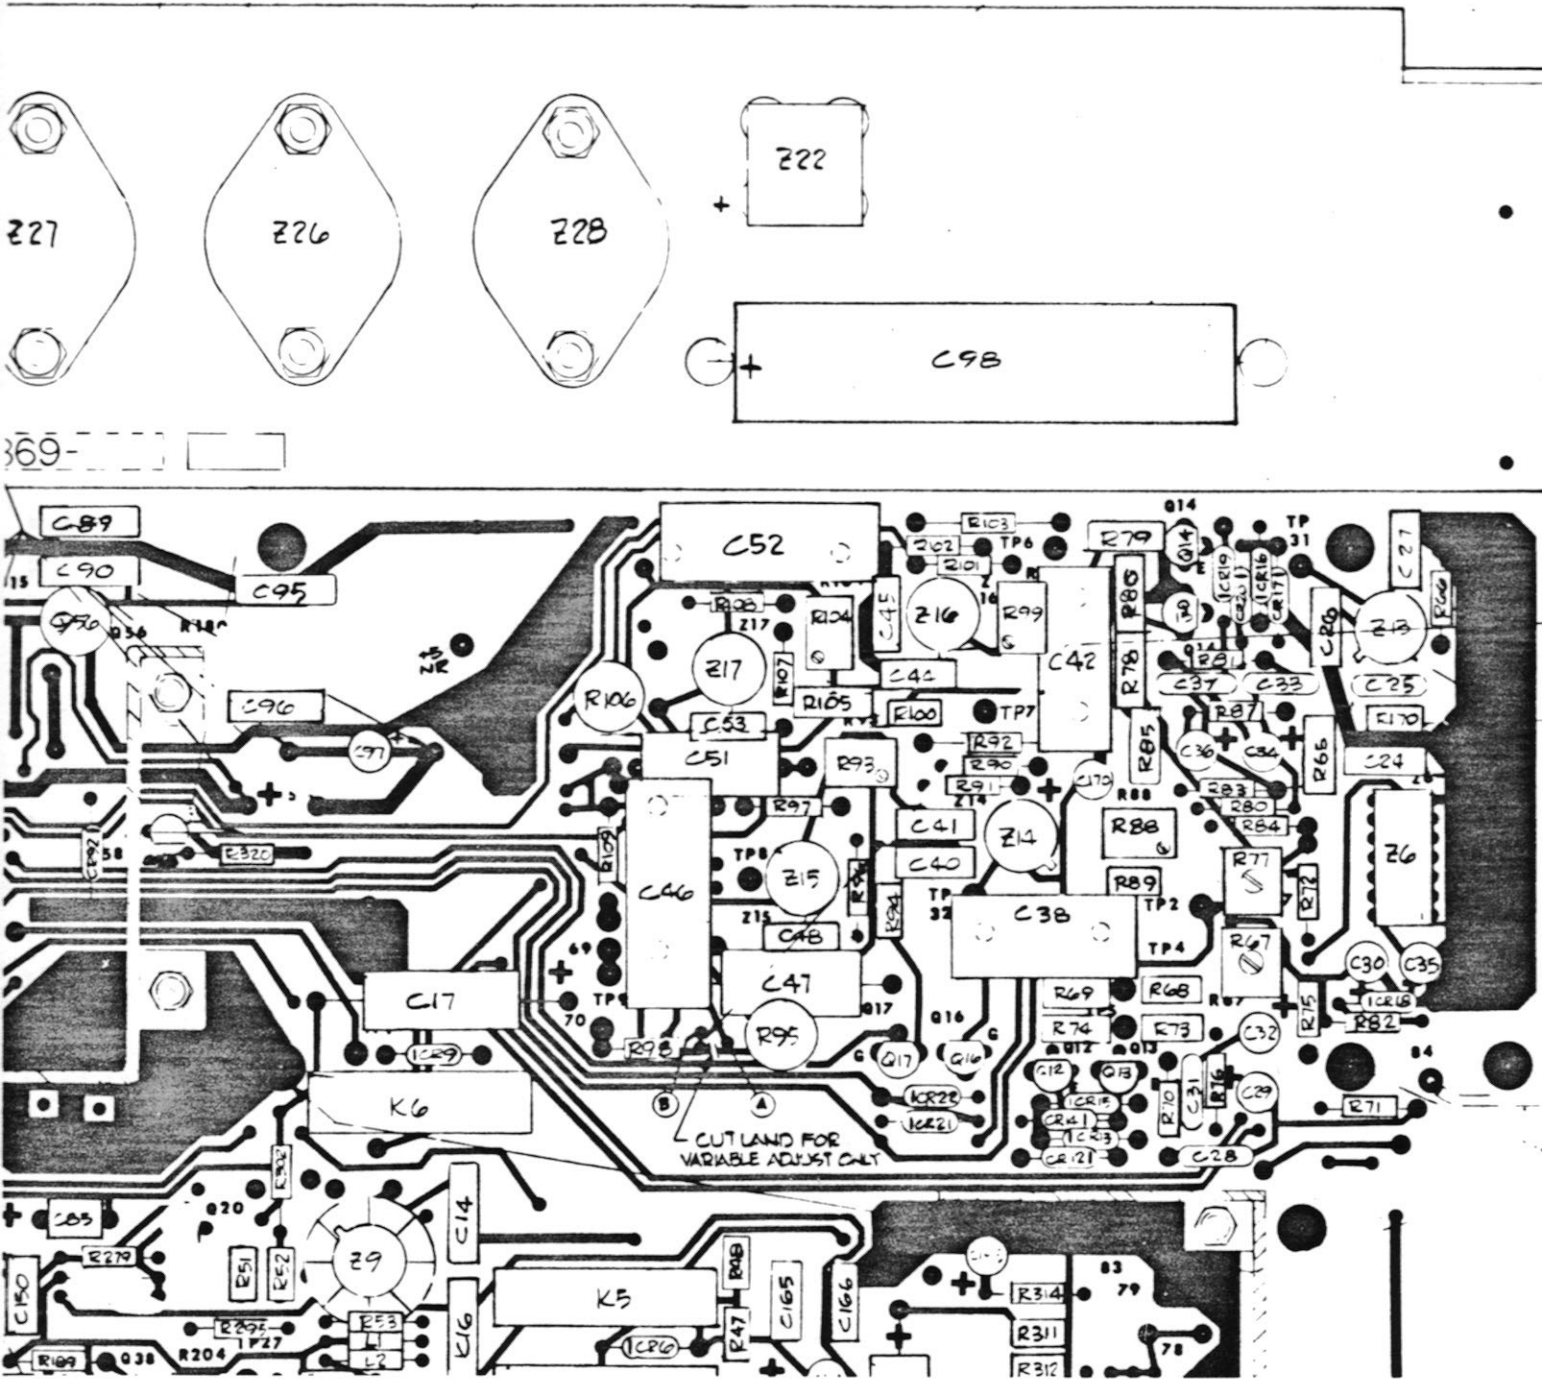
Main Board, Parts Locator (Sheet 2 of 4)
